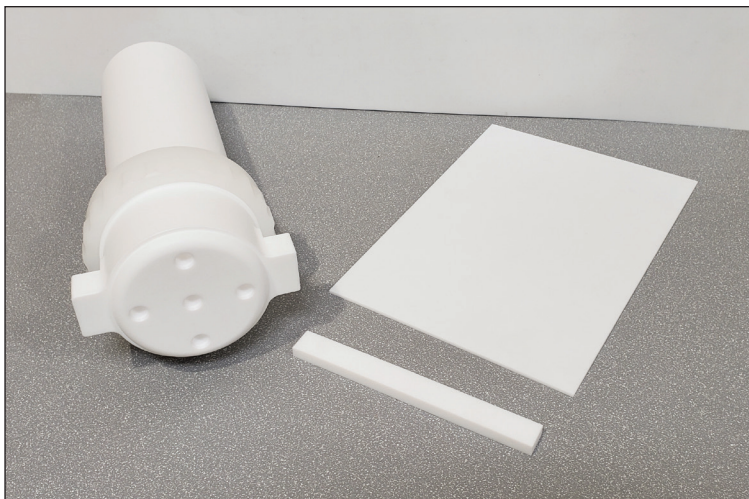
PTFE housing, compression-molded bar, and compression-molded sheet
